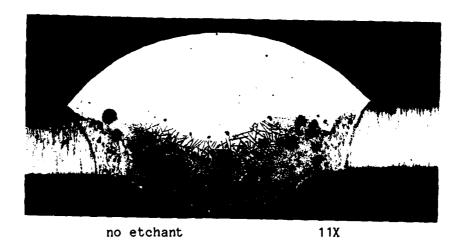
Weld made with no preweld heat treatment, AC, ER4043
